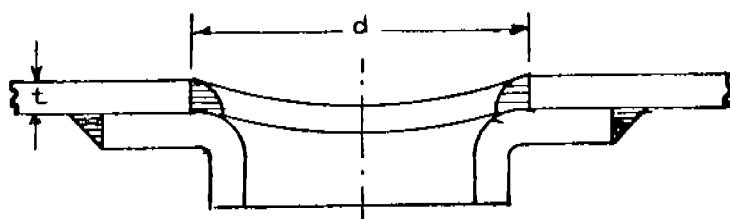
ELLIPTICAL MANHOLE FLANGED FRAME WELDED TO SHELL.
